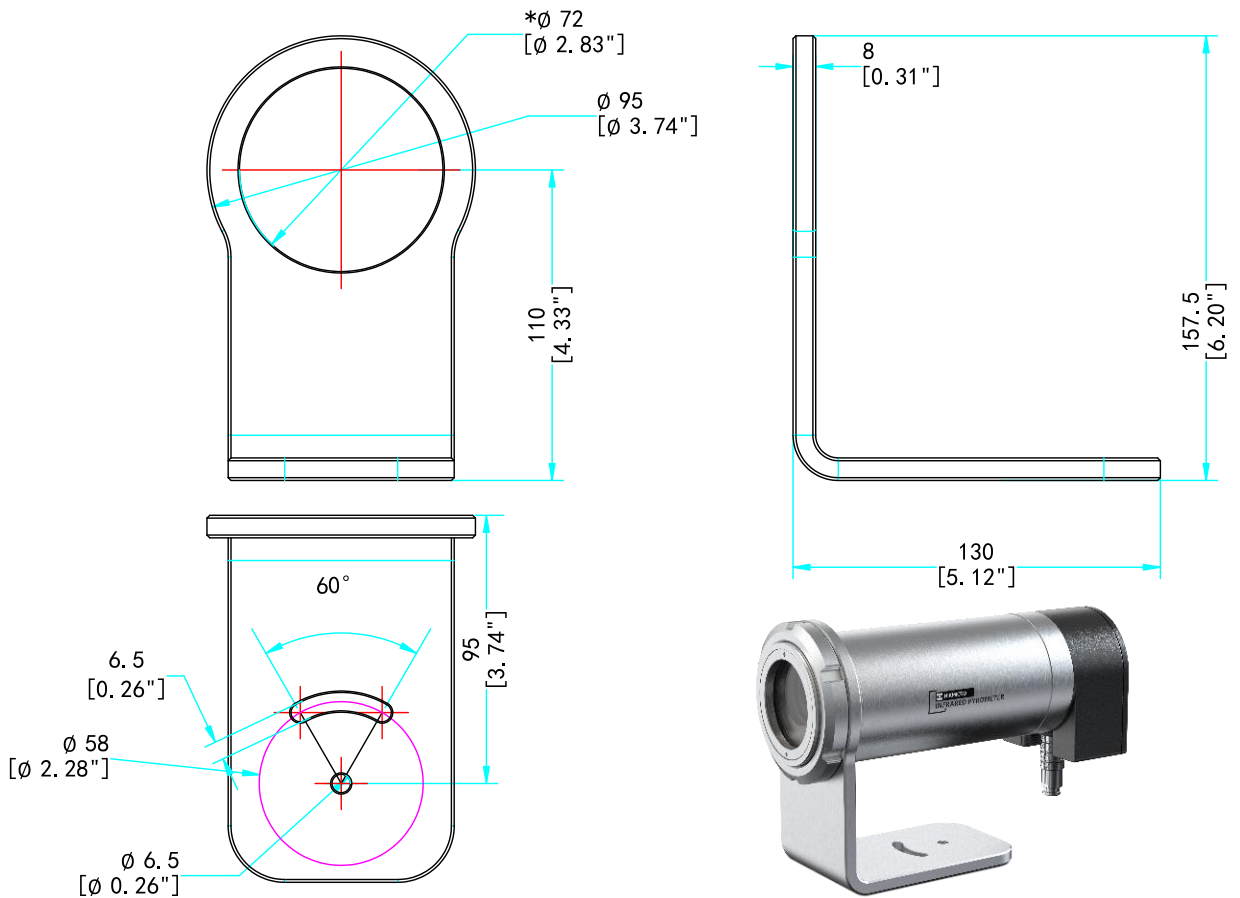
Dimension of Fixed Bracket (Unit: mm [inch])
